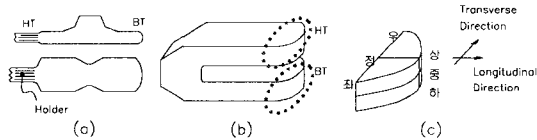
Preform, bend forging and raw specimen of crank throw (a) Preform (b) Bend forging (c) Raw specimen
